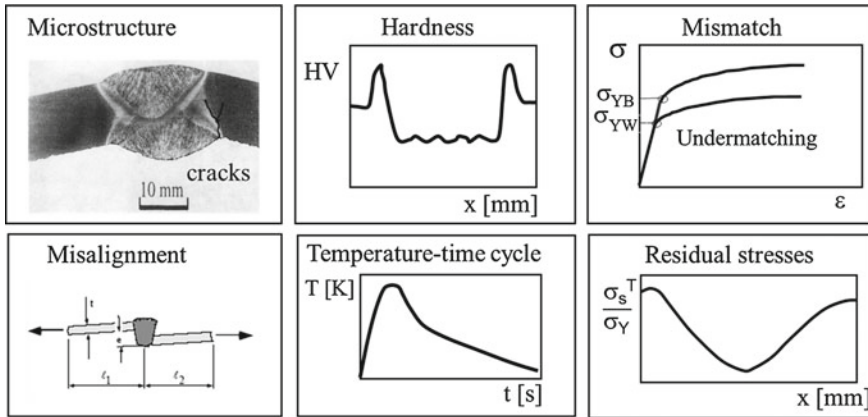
Thermic cycle during welding and effects on the weldment
